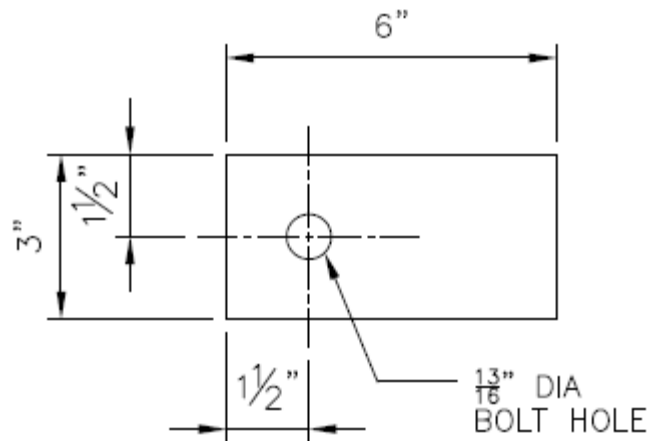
Single Bolt Shear Plate Connection
